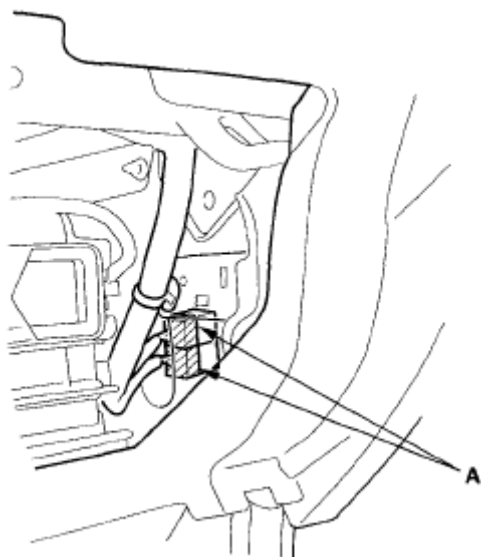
Disconnecting Passenger Door Wire Harness Connectors
